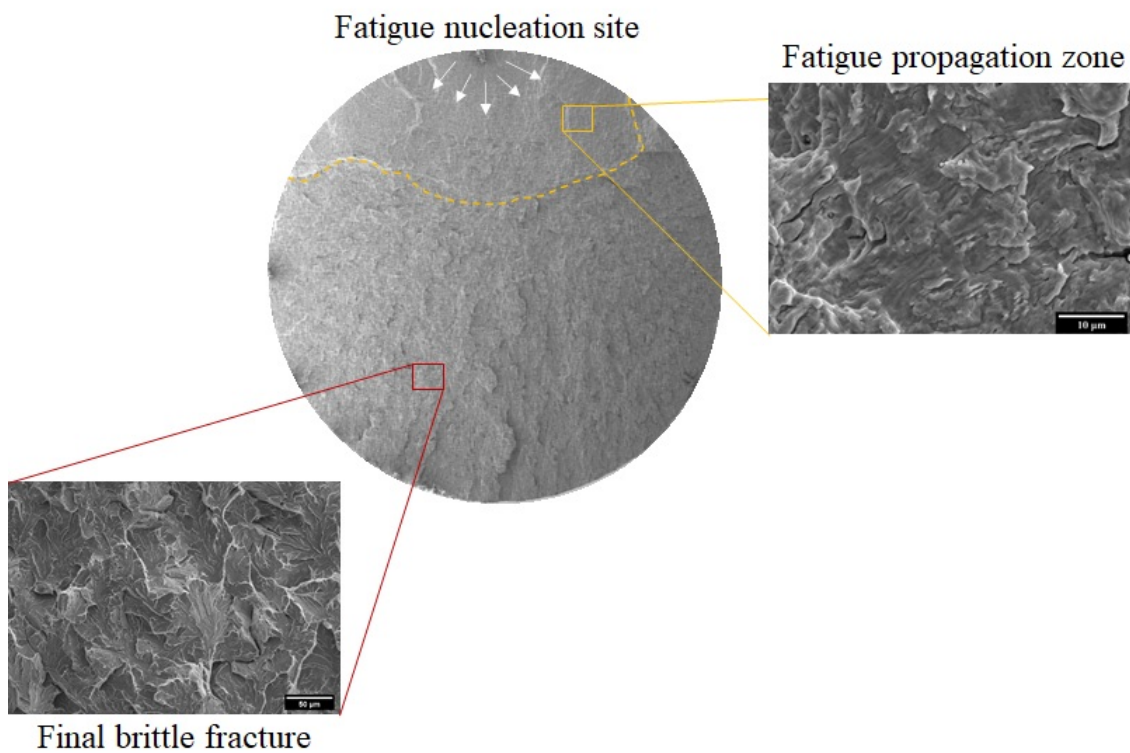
Typical fracture surface after fatigue failure observed for all tested materials
